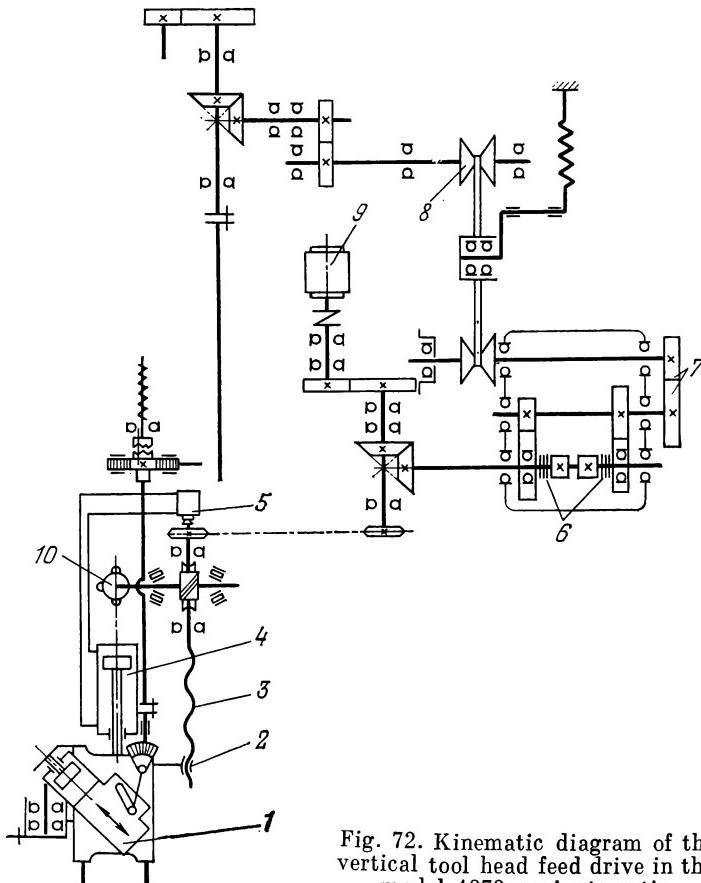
Kinematic diagram of the vertical tool head feed drive in the model 1272 semiautomatic
